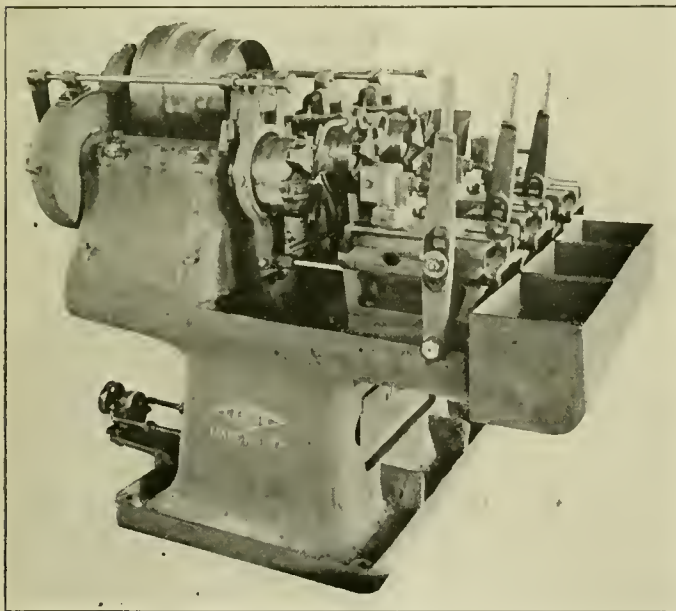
Thread-Cutting Machine Carriages Equipped with Bolt Holders
